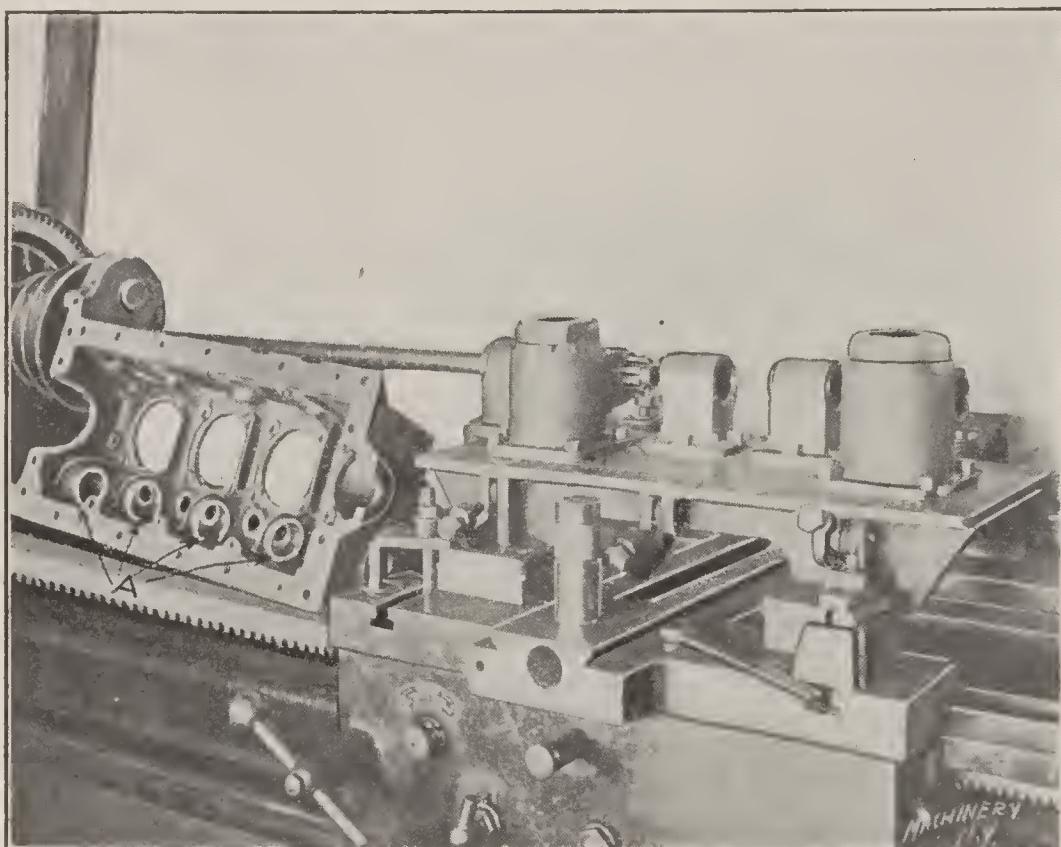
Fixture for Boring Cam-shaft Bearings in Engine Frame
